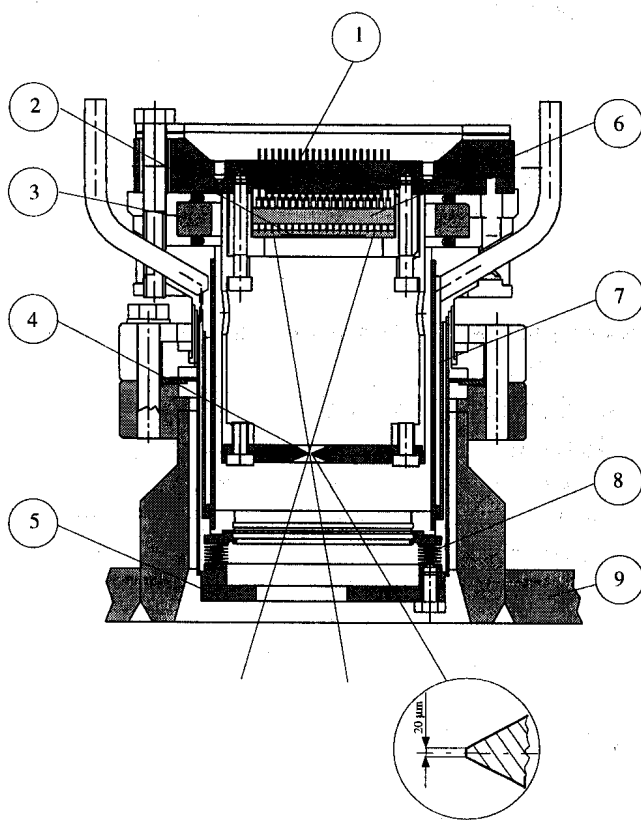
Cross-section of the TCV pinhole camera: 1, 40-pin electrical feedthrough; 2, AXUV detector array; 3, insulating ceramic ring; 4, poloidally limiting aperture, the detail shows the trapezoidal shape of its edges; 5, front plate heat shield; 6, intermediate ceramic socket; 7, water cooled spacing between inner walls; 8, stainless steel bellow; 9, TCV vessel.
